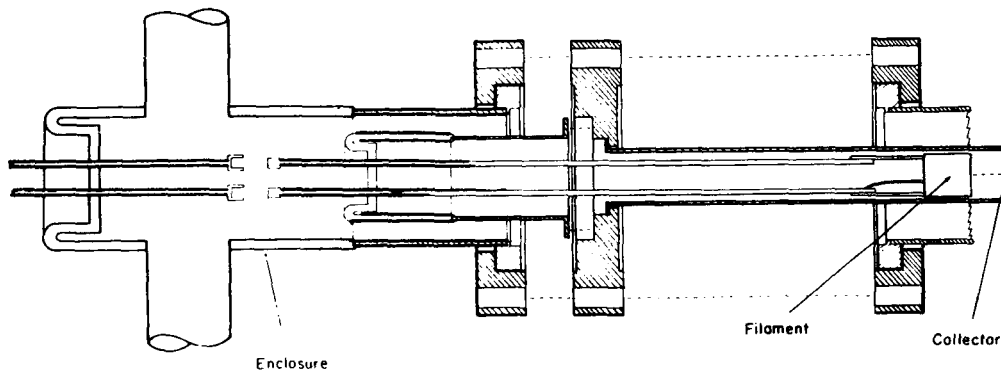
Expanded View of the Electron Gun Assembly as Finally Constructed.
